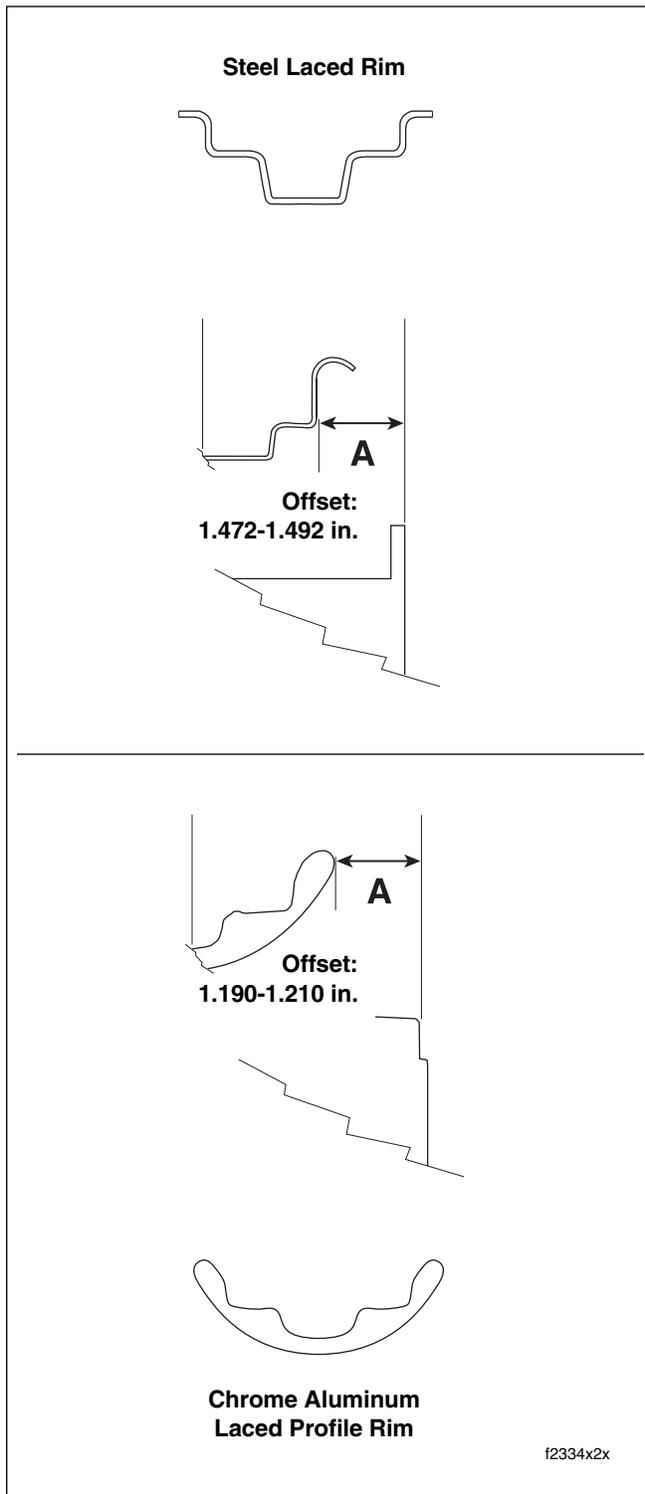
Laced Hub Offset Dimension (16 Inch Rear)
